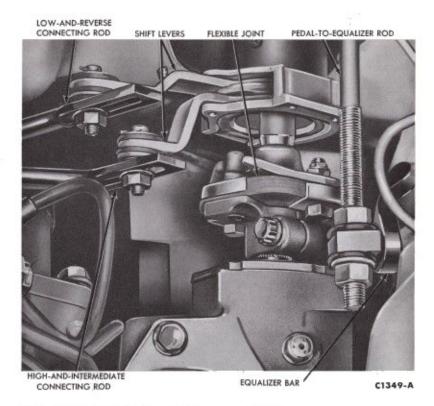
Clutch Pedal Travel Adjustment — Typical
